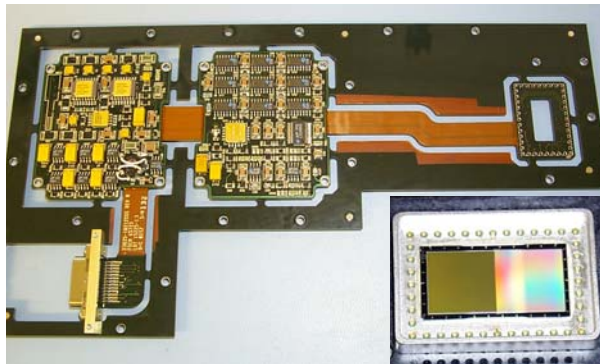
MER camera electronics rigid/flex printed wiring board assembly with CCD package (shown in inset).
